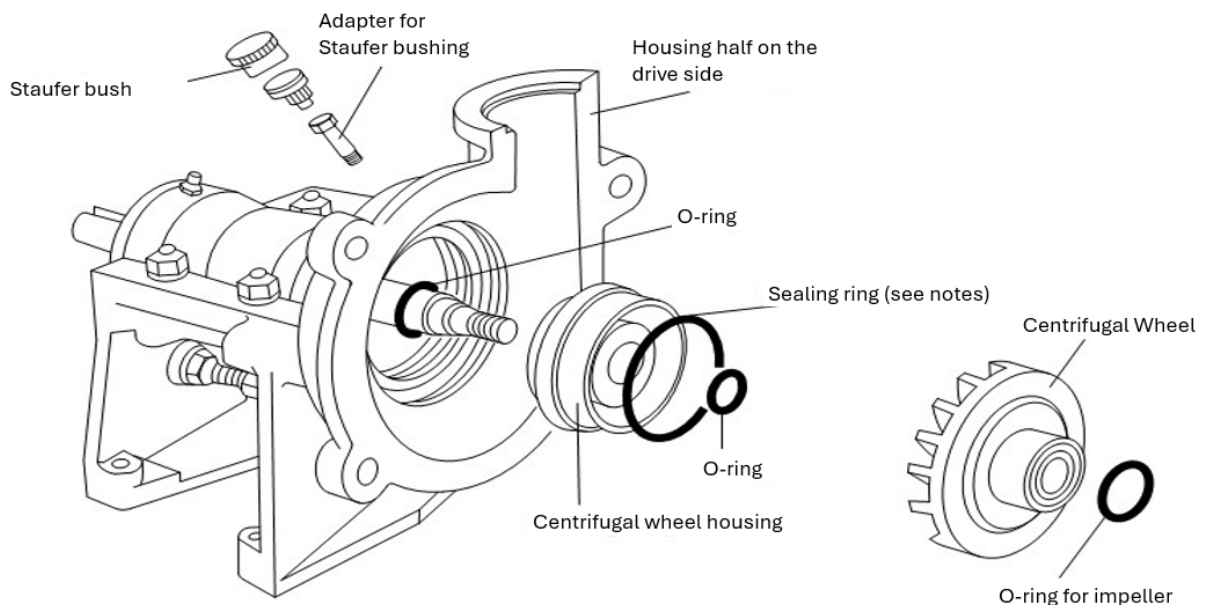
Overview Shaft Seal Centrifugal Wheel Housing
